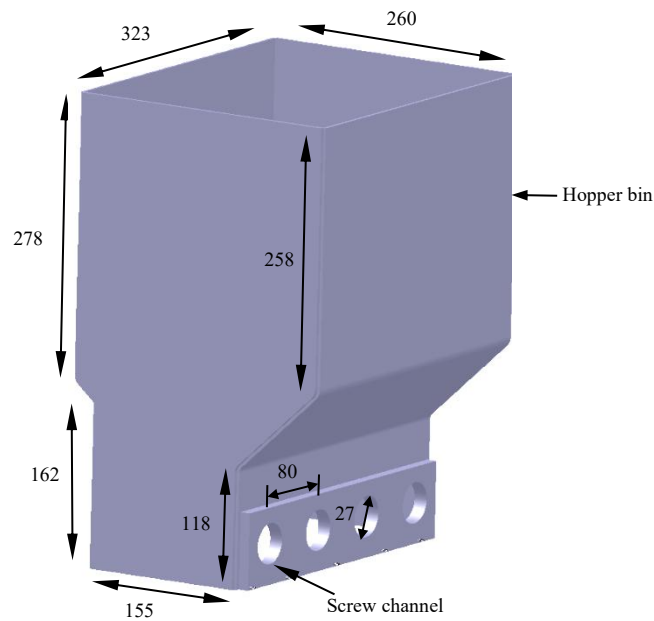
Hopper bin, screw channel geometry with dimensions shown(mm).
